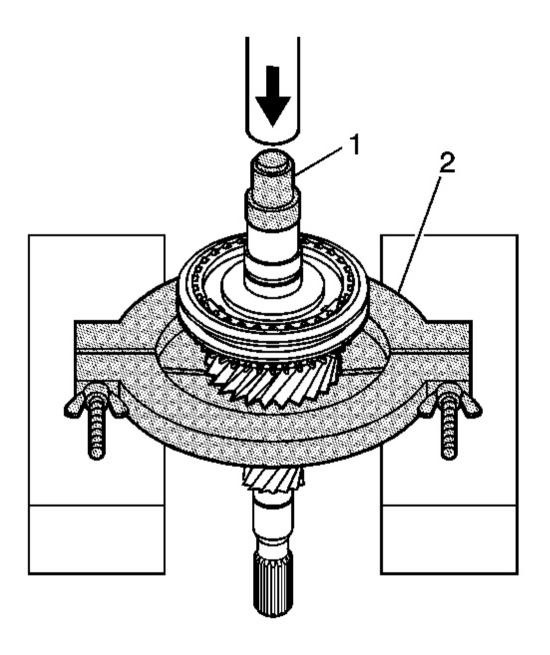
Bearing Collar, 3rd/4th Synchronizer, J 36513 & J 44378 Courtesy of GENERAL MOTORS CORP.
